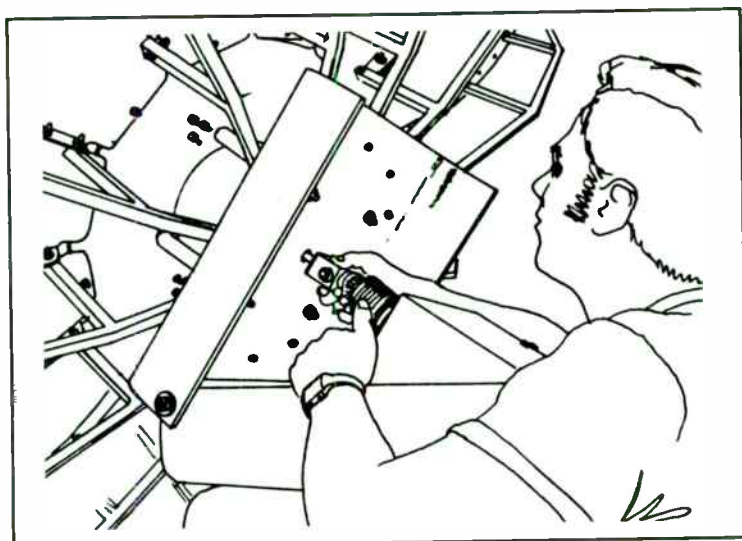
Tightening the complete assembly with dish tilted forward again requires two people.
